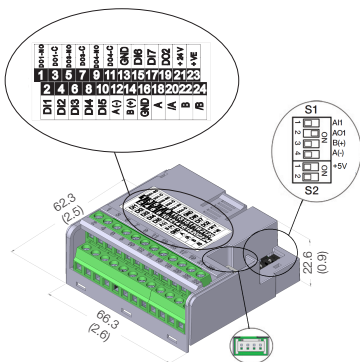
CFW500-ENC2 dimensions in mm [in],
